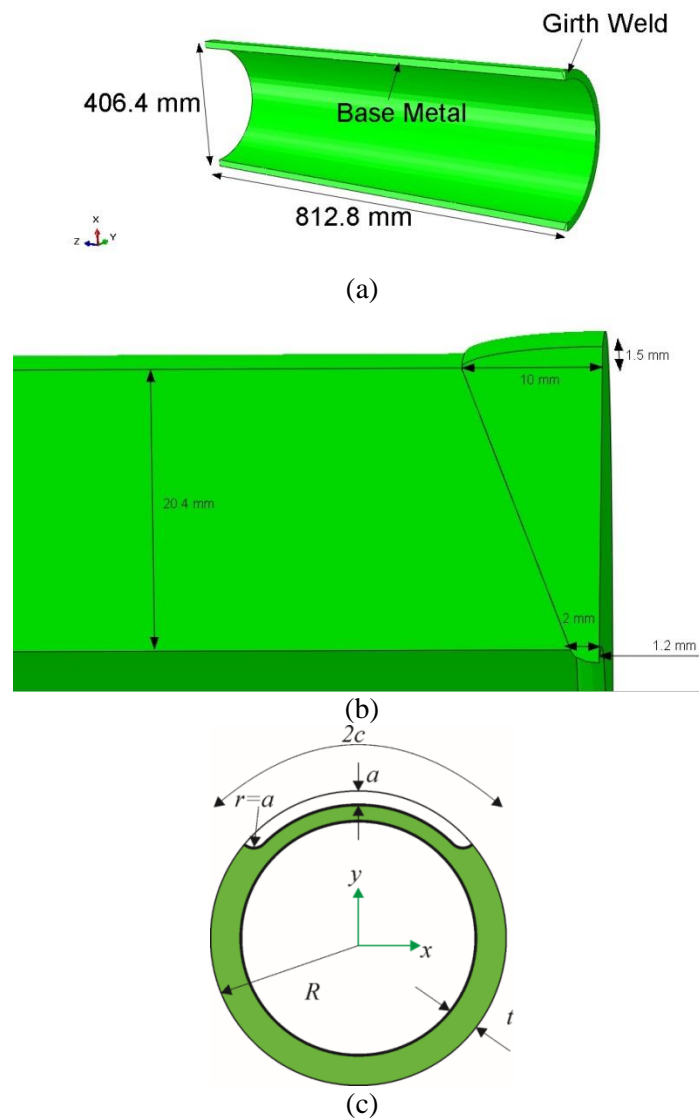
Schematic drawing of the girth welded pipeline: (a) configuration of girth welded pipeline, (b) geometrical dimension of the girth weld section, (b) typical geometry configuration
